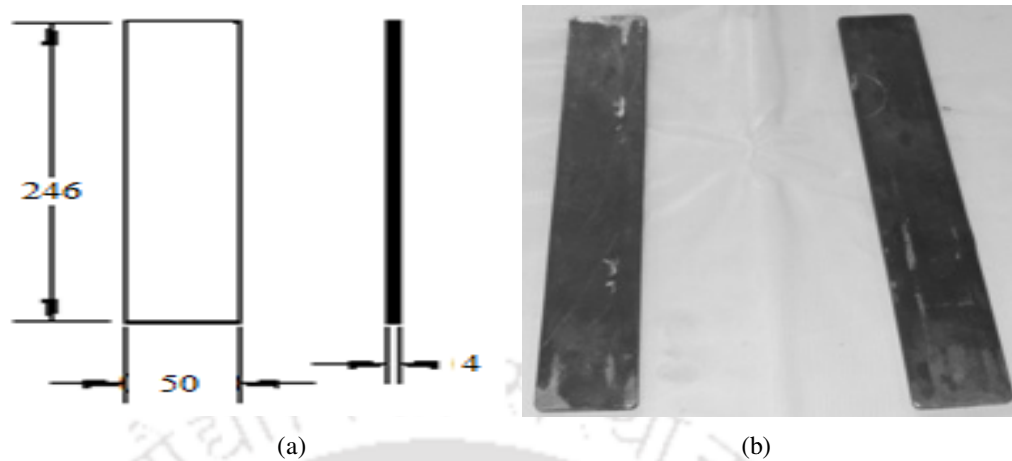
(a) Detail drawing and (b) image of backing plate
